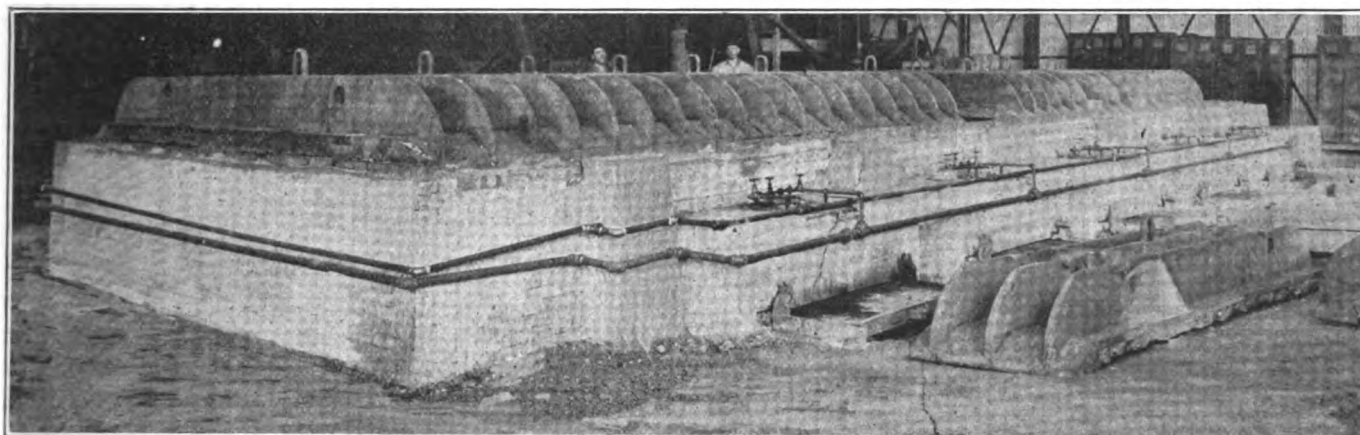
Low temperature preheating furnace. Removable section shown at the right.
